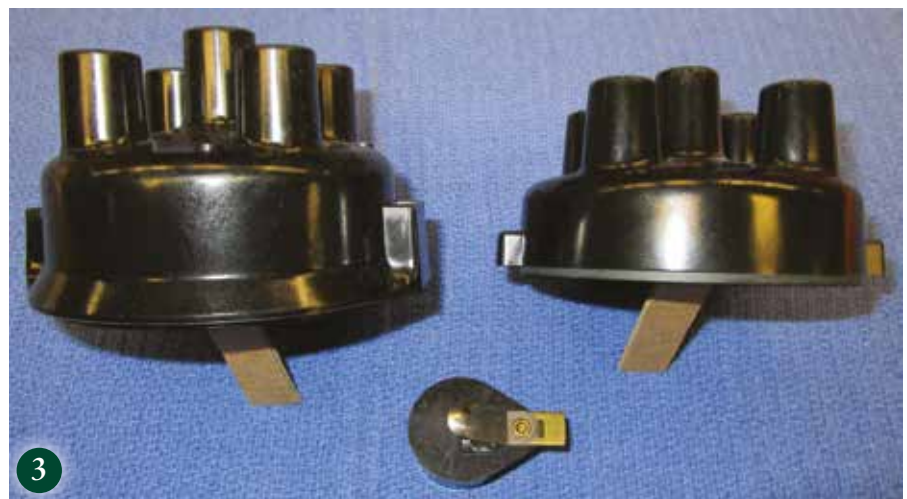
shows the original DR-405 distributor cap on the left with the machined one on the right. In front of them is the Standard rotor DR-158 used with the DR-405 cap. An adapter has to be made to fit the rotor into the distributor of the ML magneto. You can see how the bottom of the stock cap is machined off and the diameter slightly decreased to fit within the base of the magneto distributor.
